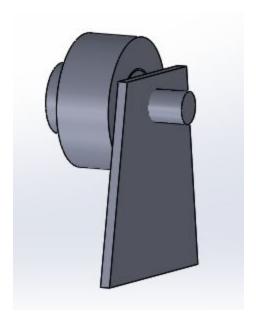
Picture of Motor and Motor Mount with Chain Tightener
